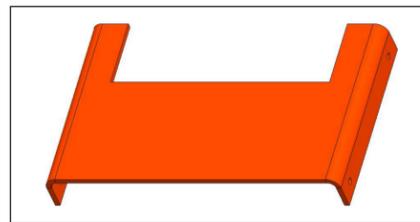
Top Shroud Multi-Bracket with Rotator Cutout
